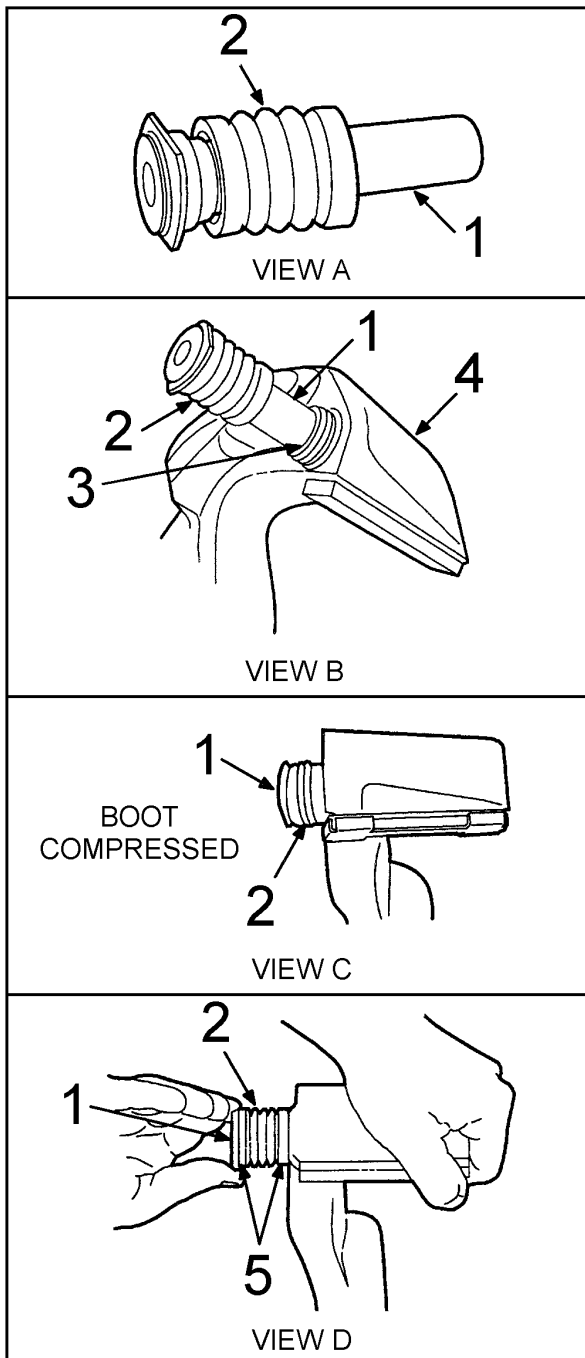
Install Guide Pin Boot on Guide Pin and Anchor Plate Boot Grooves
